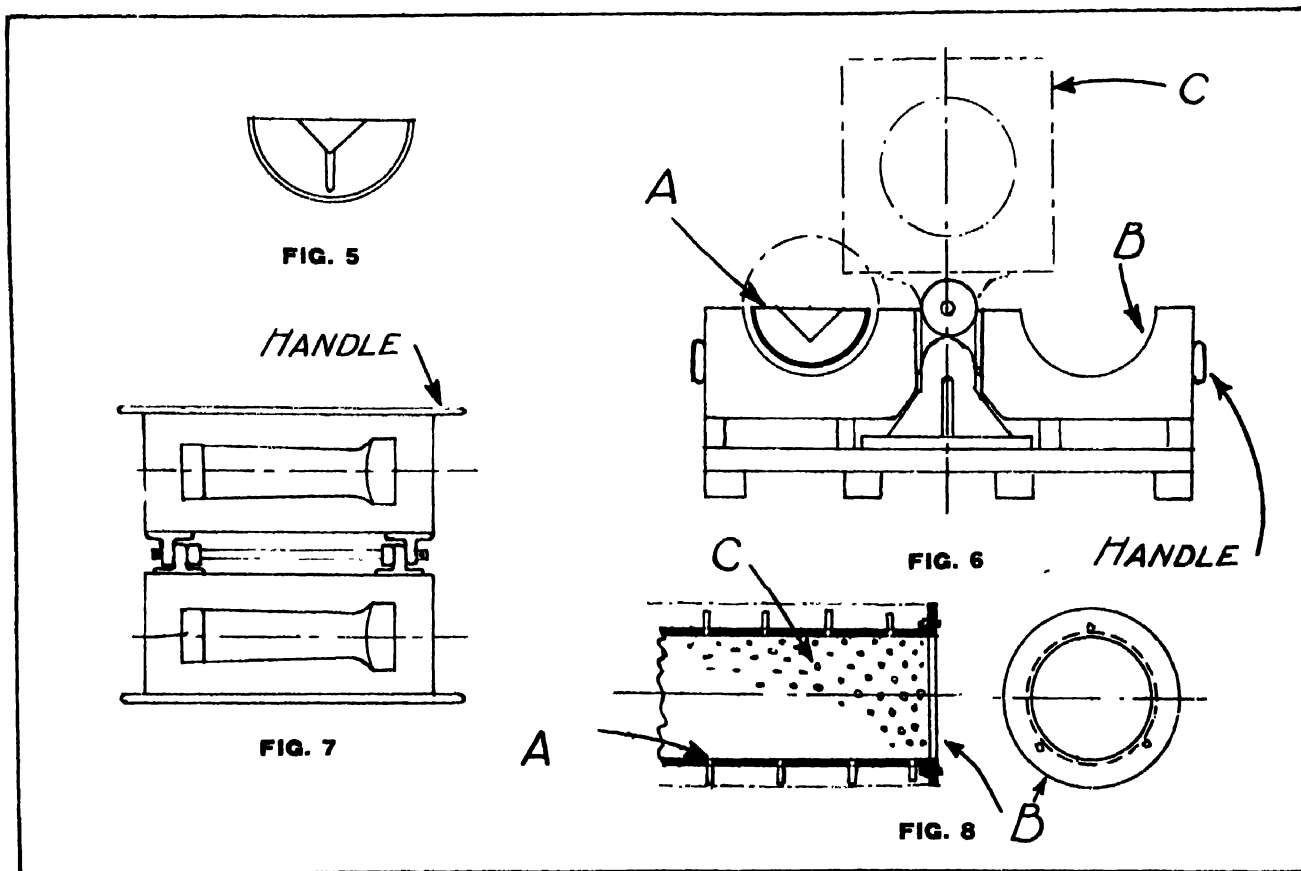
ONE OF THE ARBOR WINGS FIG. 6—END VIEW OF TWO PART COREBOX FIG. 7—SHOWING DETAIL OF HINGES FIG. 8—SECTION AND END OF A CORE BARREL PROVIDED WITH WOODEN PEGS TO CARRY THE SAND
